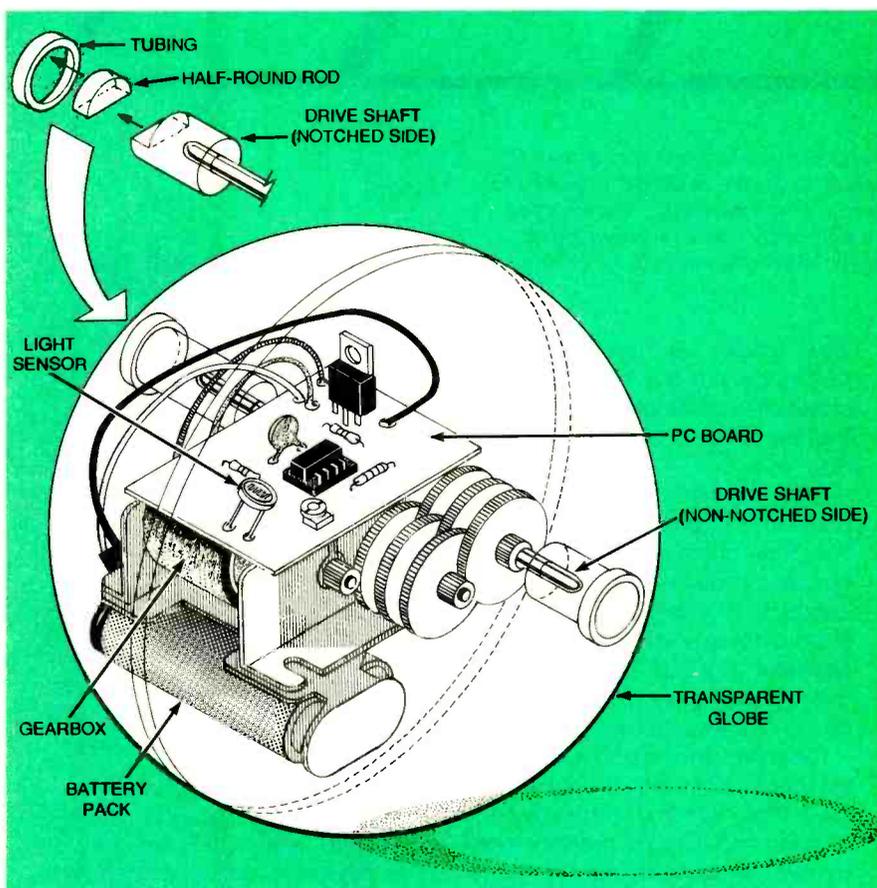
The Solar Ball Robot's gearbox assembly is suspended in the center of the globe. When the motor runs, the gearbox rotates around the axle, rolling the robot along. The gearbox is held inside the Solar Ball Robot with pieces of tubing and rod. Although you can use wood or brass for the tubing and rod, clear plastic is easier to work with, and looks more interesting.
